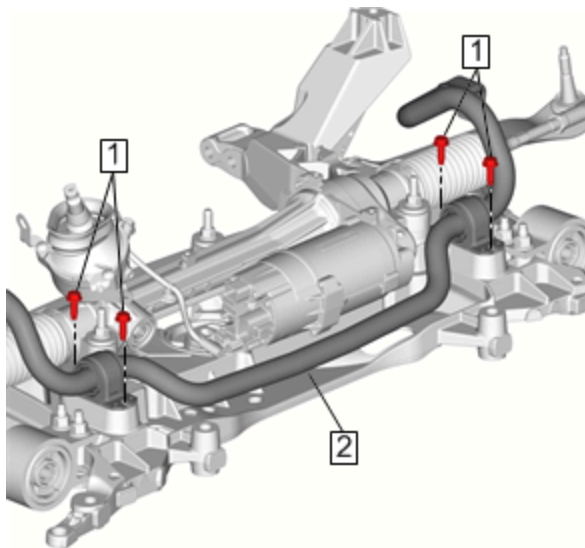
Front Stabilizer Shaft And Insulator Clamp Bolts
